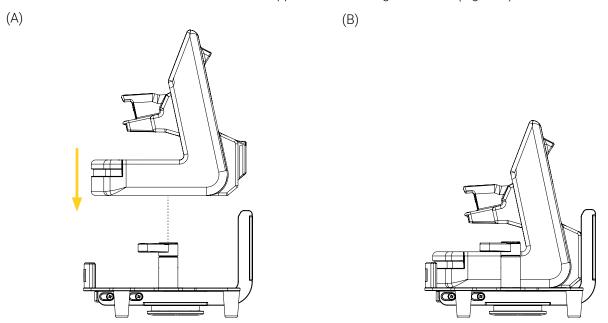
Installing the medical device in the support bracket with a bottom micro disc
